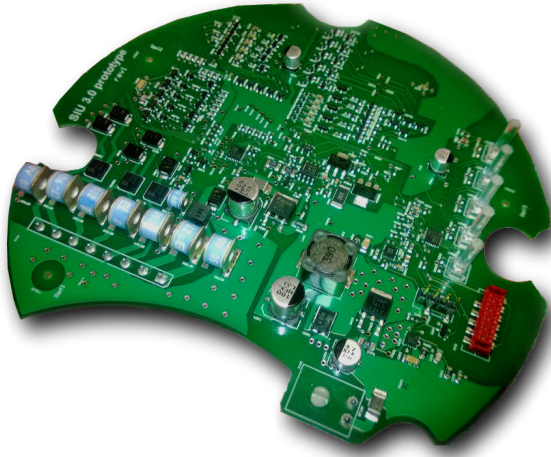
Finished hardware SIU 3.0 prototype PCB with components.
